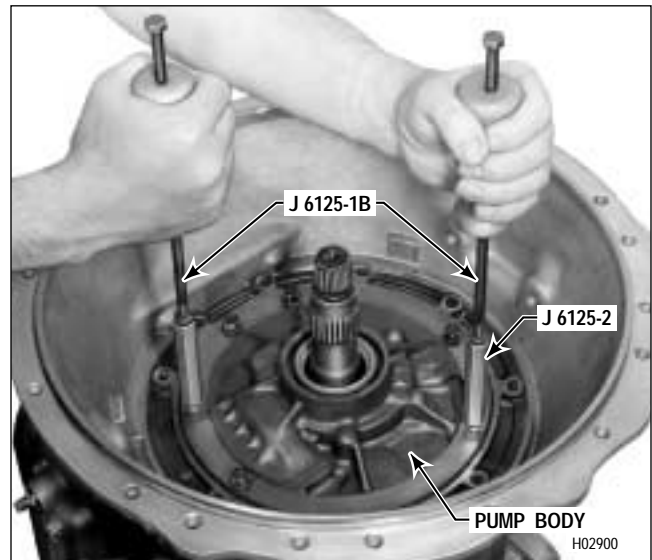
Removing Pump Assembly (Models without Retarder)
